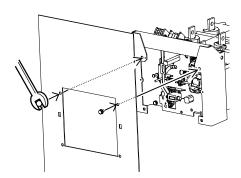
Align to the panel holes and mount the VCB with two (2) upper bolts on the panel.
